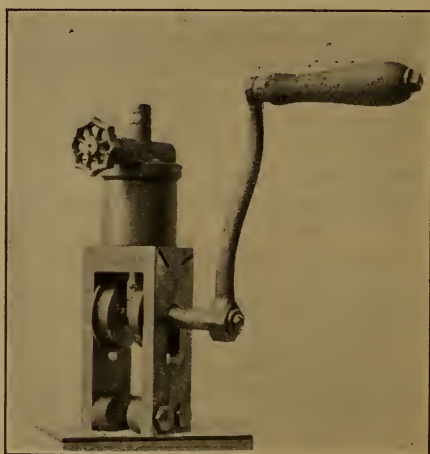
MACHINE FOR FITTING VEHICLE SPRINGS.
